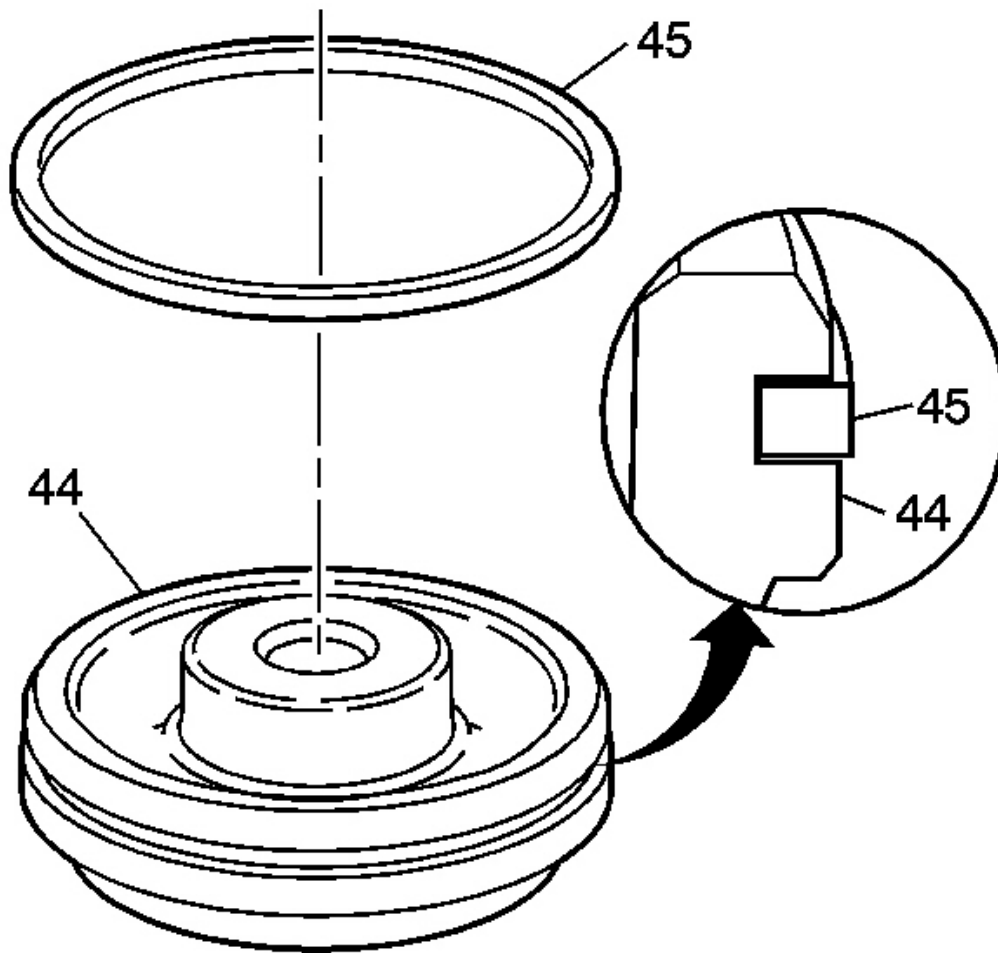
Identifying Inspection Areas On 3-4 Accumulator Piston
